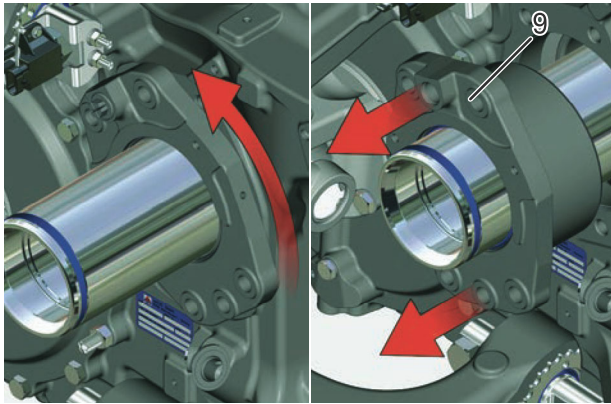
Rotate the guide sleeve (9) to create a notch, and remove it using two levers.
